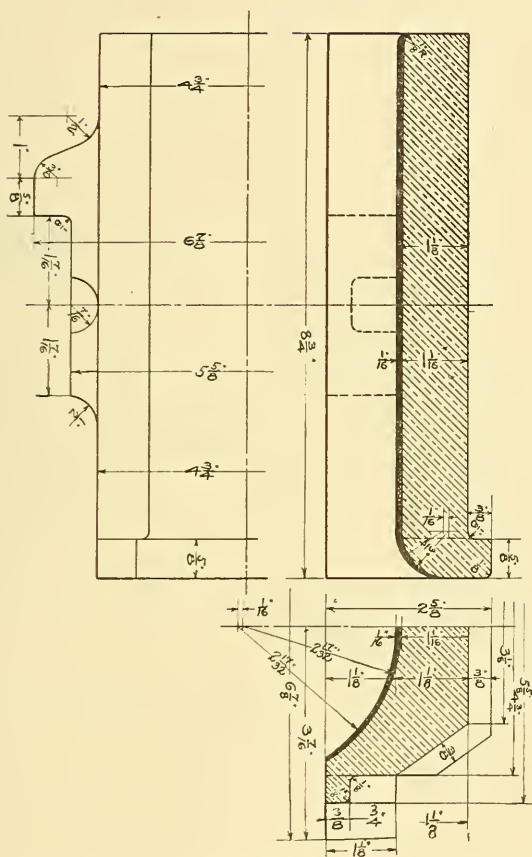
5x9 Journal Bearing for Cars of 40 Tons.
